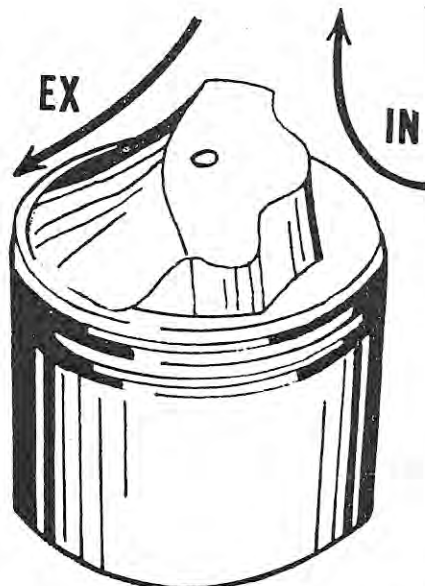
Long sloping side of piston deflector must be installed downward, toward exhaust ports.
